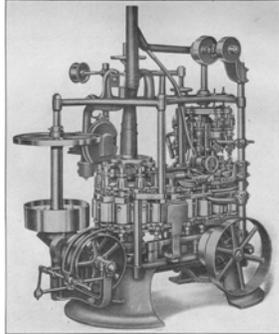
A modern automatic machine for shaping and drilling buttons. (See p. 71.)
